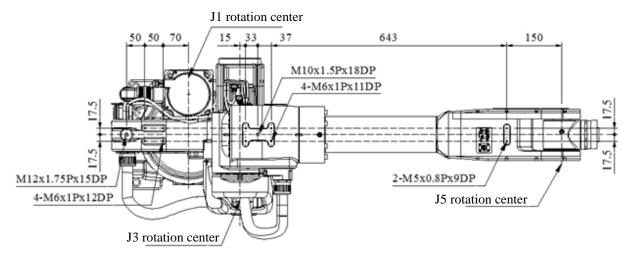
(d) RA610-1672-GB Mounting surfaces on the robot RT610-1672-GB Mounting surfaces on the robot
